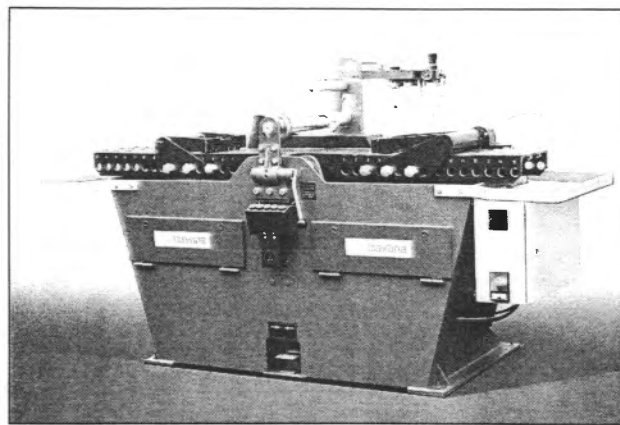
Universal wood bending machine for chair frames and open shapes STUZAMA.
